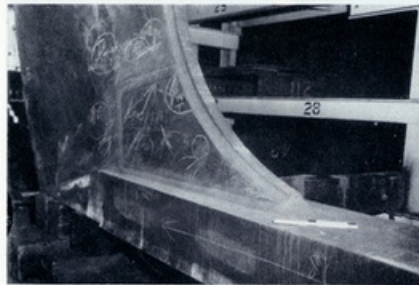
CLOSE UP OF WELD to skeg showing details.
